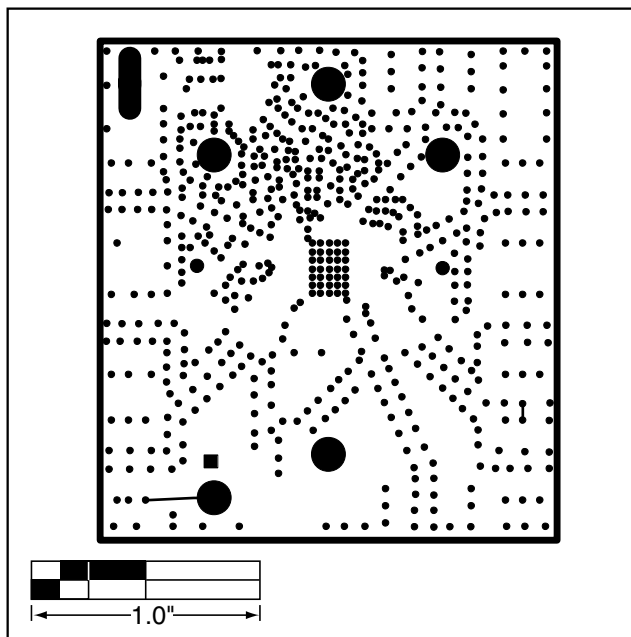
MAX2720/MAX2721 EV Kits PC Board Layout—Ground Plane (Layer 2)
